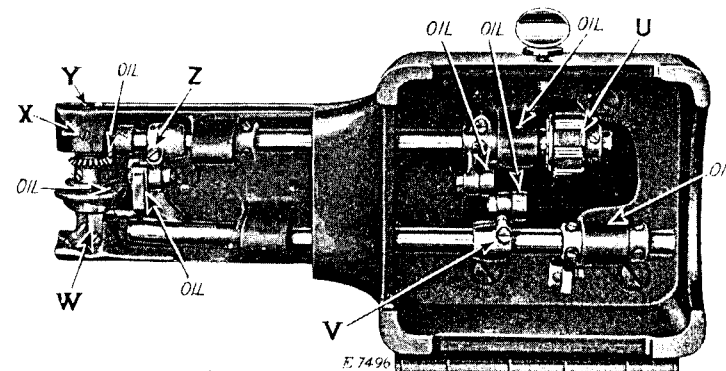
Base View of Machine, Showing Oiling Points Also Adjustments on the Machine
